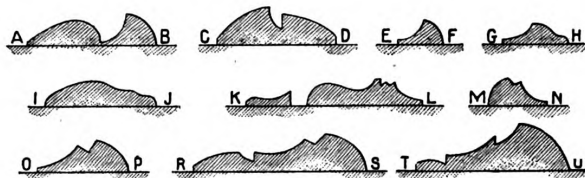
Sections of Scroll Taken on Lines Indicated.
